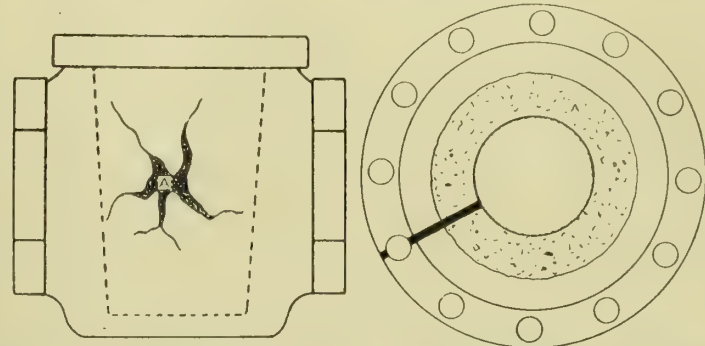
CAST-IRON PLUG COCK WHICH
